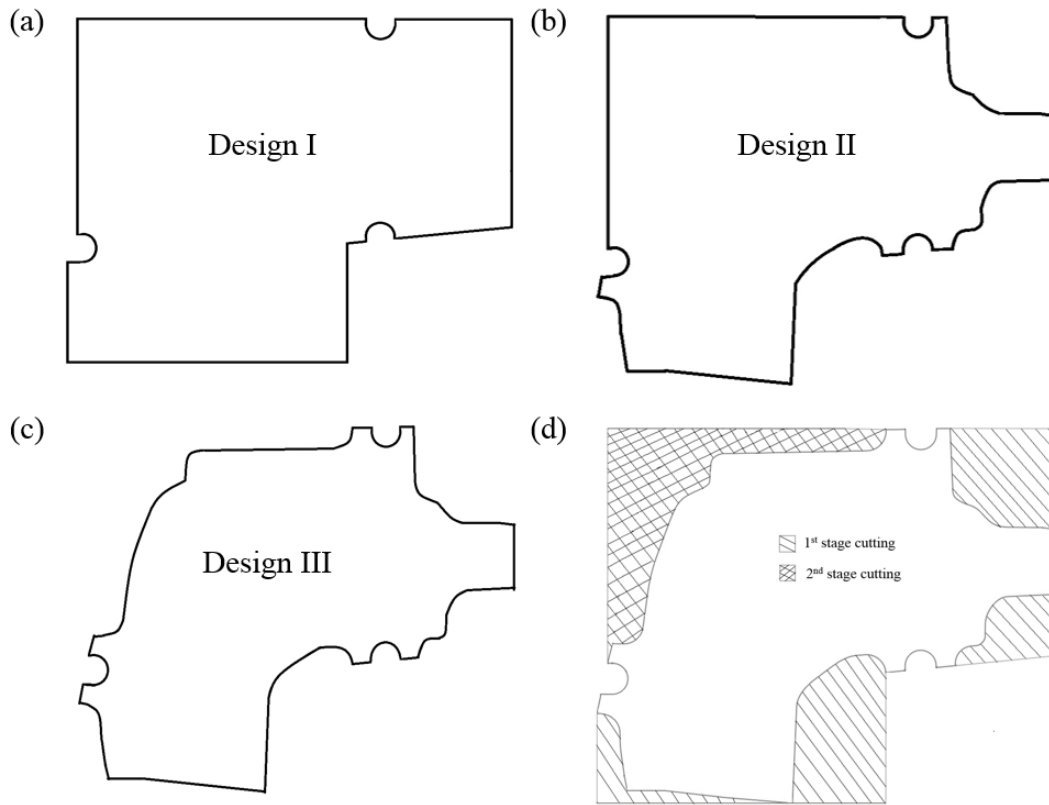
Initial blank shape designs a) Design I b) Design II c) Design III d) initial blank shape designs procedures from Design I to Design III
